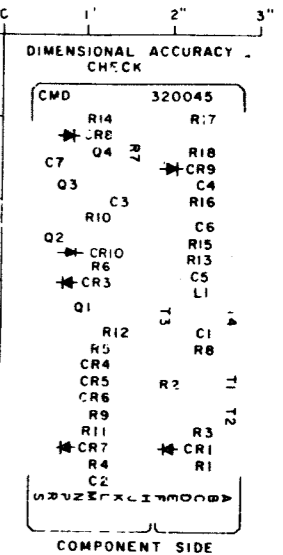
Clutch Magnet Driver 321991 (Sheet 2 of 2)
